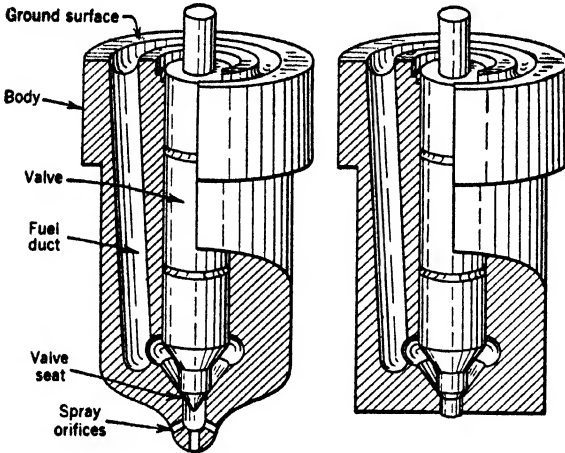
Multiple-hole and pintle-type nozzle tips for Bosch fuel-injection nozzle.
